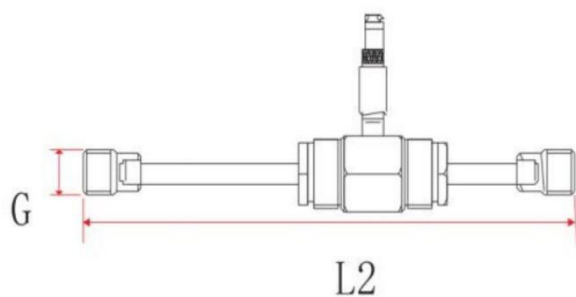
DN4~DN10 Threaded Turbine (Including Straight Pipe Section) Dimensions
